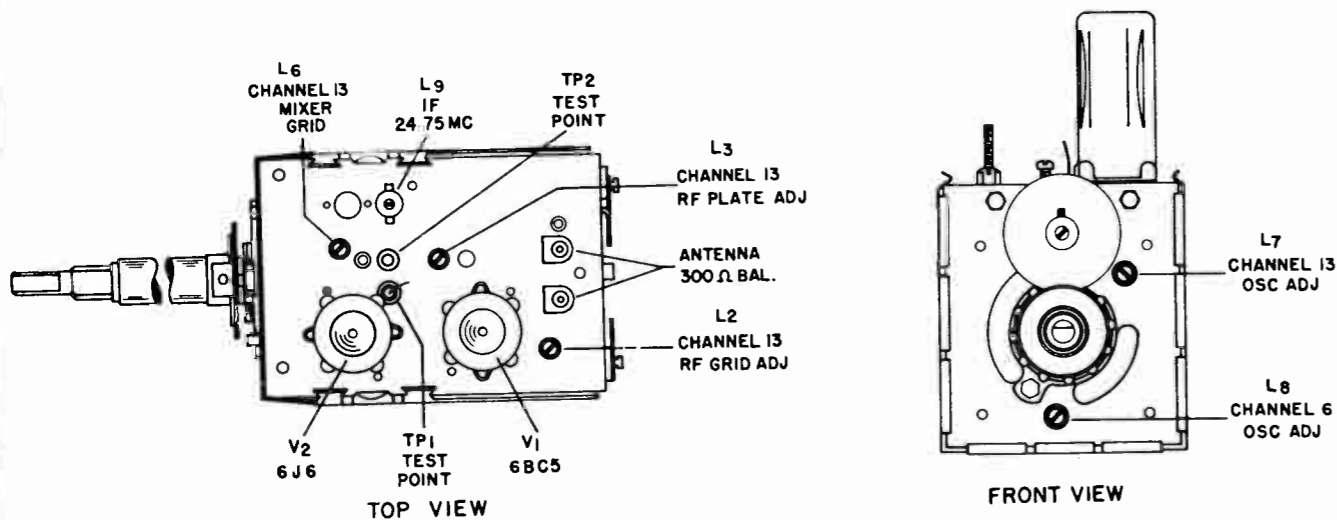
A. 1C1345 Pentode TV Tuner Alignment Adjustments
